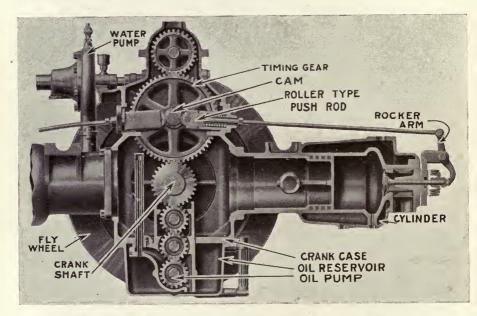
Sectional View of Two Cylinder Opposed Motor.
